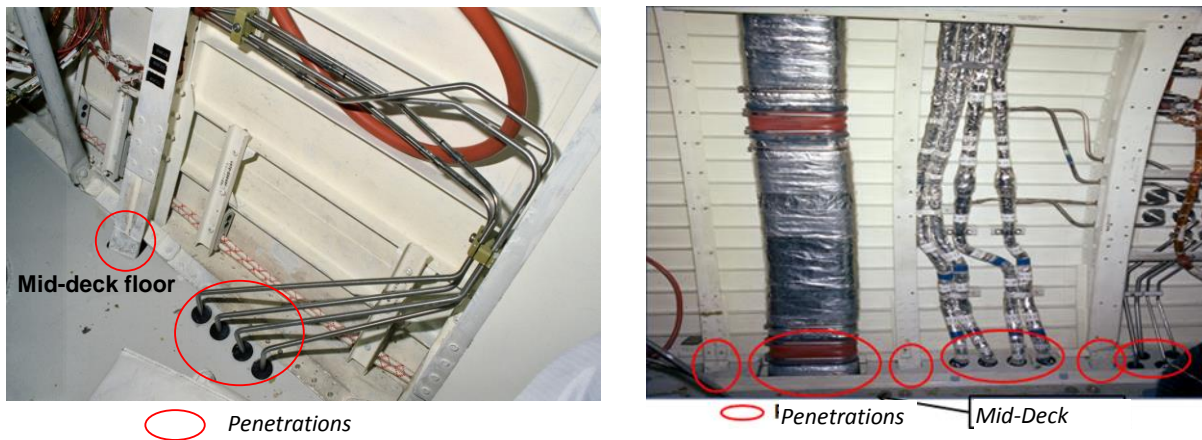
Mid-deck floor views of penetration of frames and tubing.
